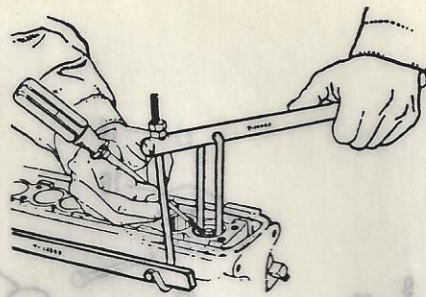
Special tools are provided for removing the valve spring retainers as shown. Refer to text.
